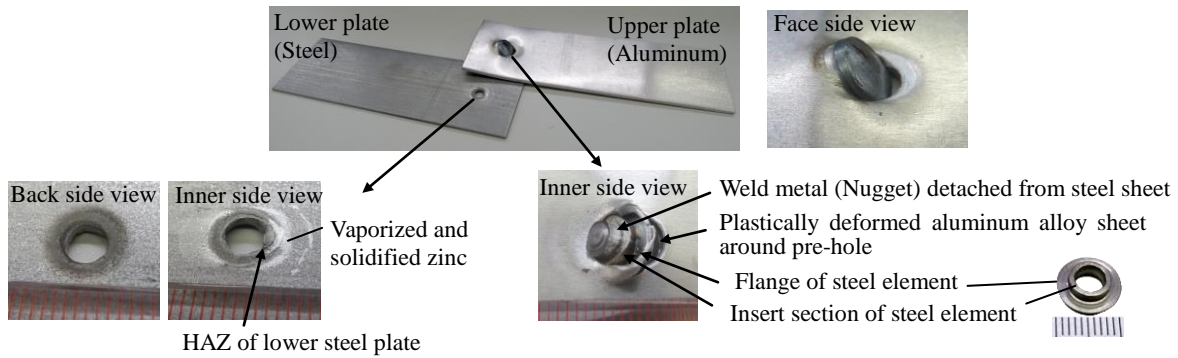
Typical fracture appearance of EASW joint in tensile shear test
